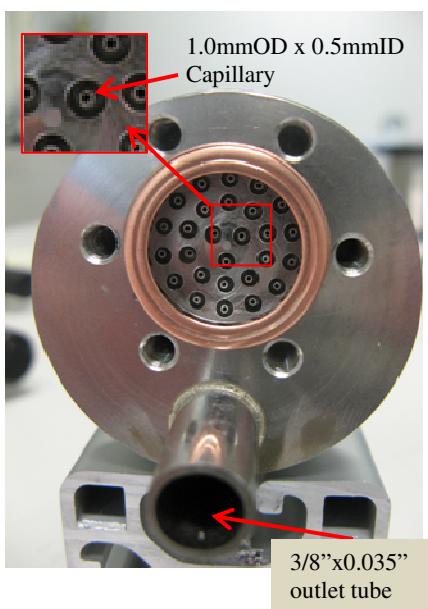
Evaporator inlet manifold and outlet connection.
